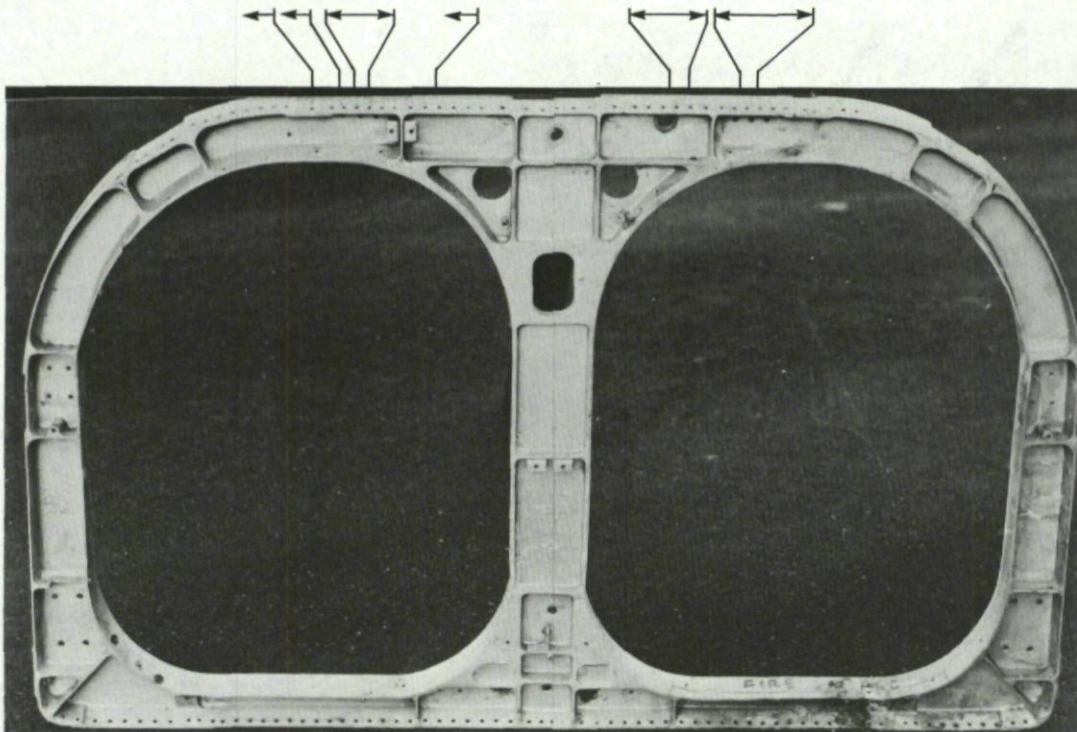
Stress corrosion cracking in a 7075-T6 fuselage frame, case history 13-8. Arrows indicate the directions of cracking away from fastener holes.
